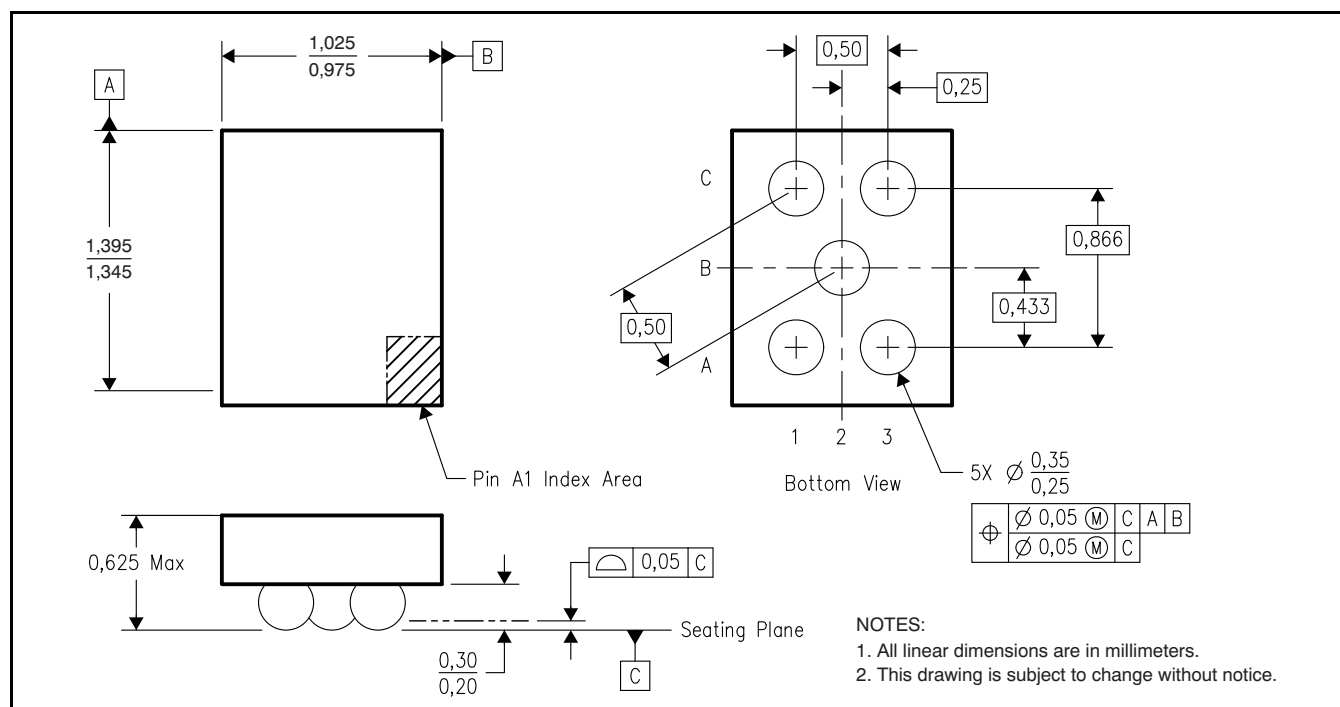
YZU Wafer Chip-Scale Package Dimensions (in mm)
